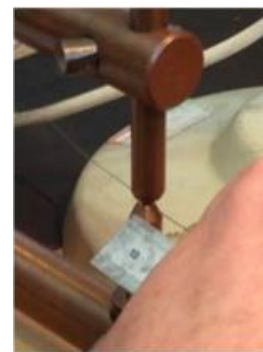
Photograph of Spot-welded joints [2]
